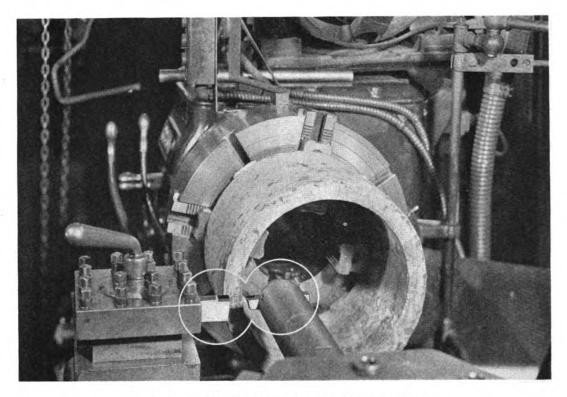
Set-up of Firthite boring and turning tools in a horizontal turret lathe for machining rod brasses at 400 ft. per min.—As many as 500 bushings are finished between tool grinds
